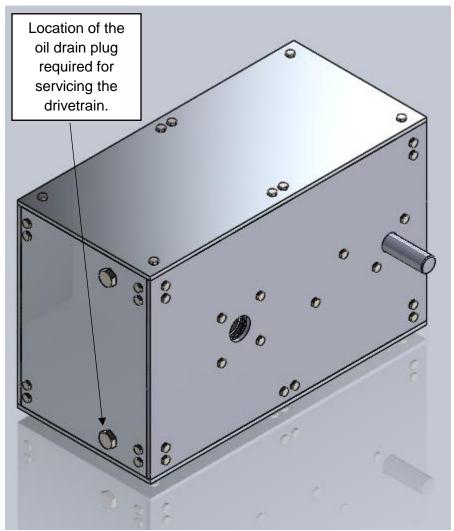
The housing plates with the addition of the CNC'd shaft locations and fill and drain plugs located on the back housing plate to allow for oil drainage and replacement.
